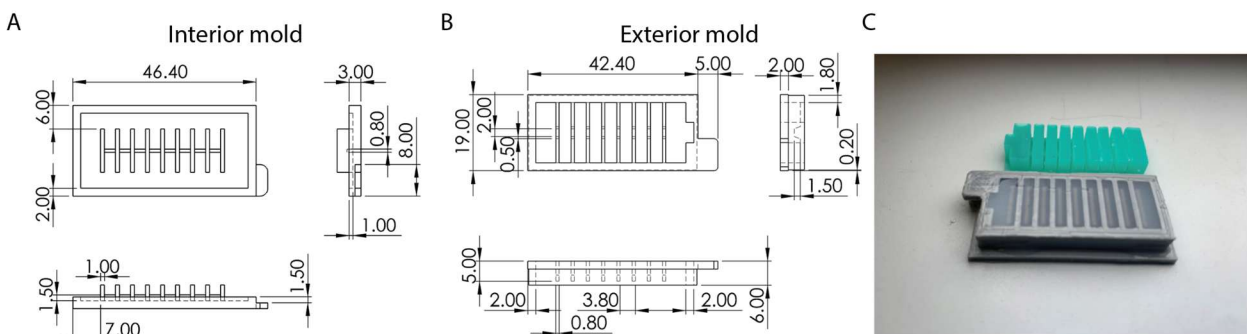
The fabrication of the pneumatic bending units. (A) Dimensions (mm) of the interior mold for the pneumatic bending unit. The top, side, and front views are included. (B) Dimensions of the exterior mold. (C) The cured and
